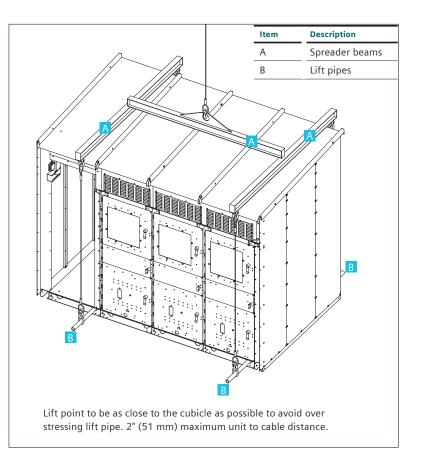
Lifting outdoor Shelter-Clad switchgear with crane
